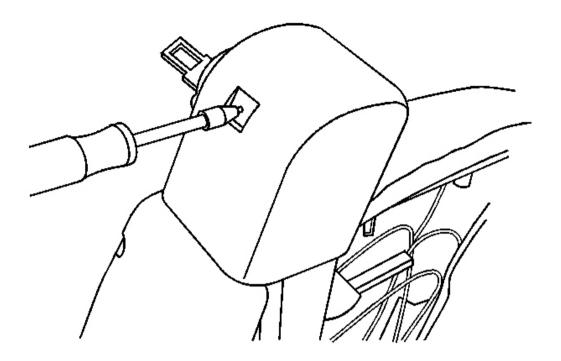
Retractor Tower Retaining Screw Courtesy of GENERAL MOTORS CORP.
